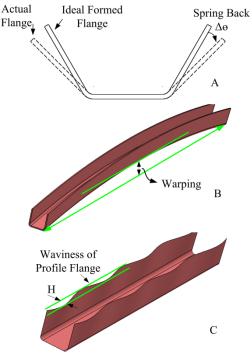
Roll forming defects A: spring back, B: warping and C: flange waviness
